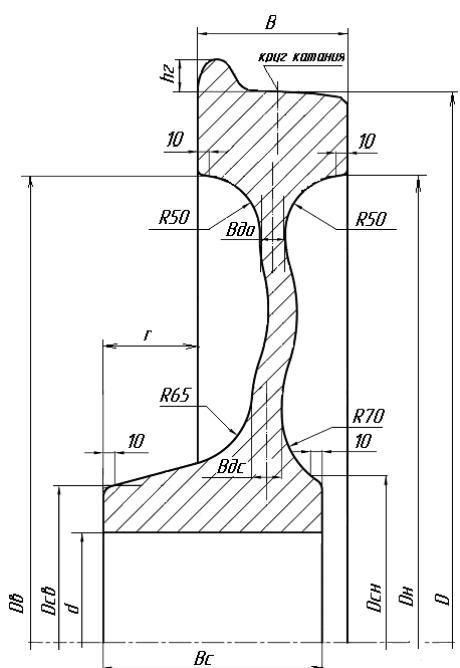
Cone-and-plate rolled wheel design and basic dimensions
